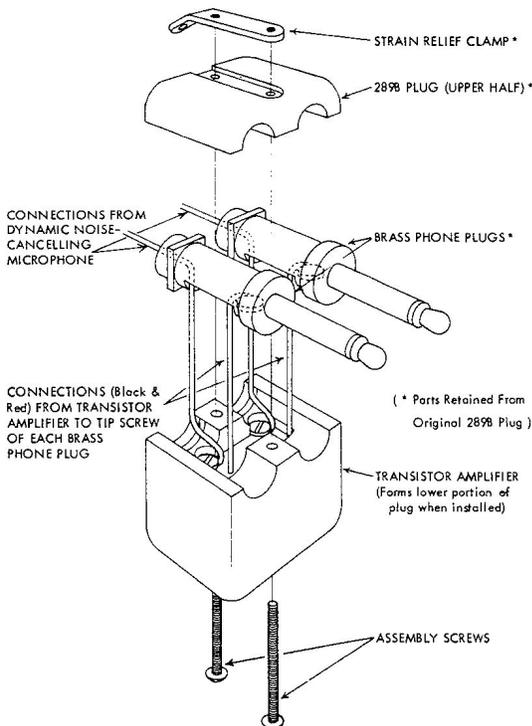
Exploded drawing of transistor amplifier and plug (after installation).
